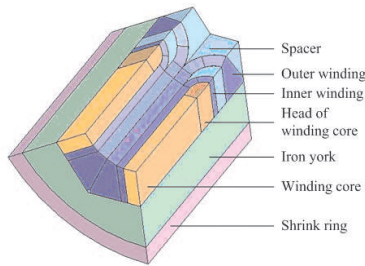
The structure of the SECRAL 1/12th sextupole magnet assembly.
